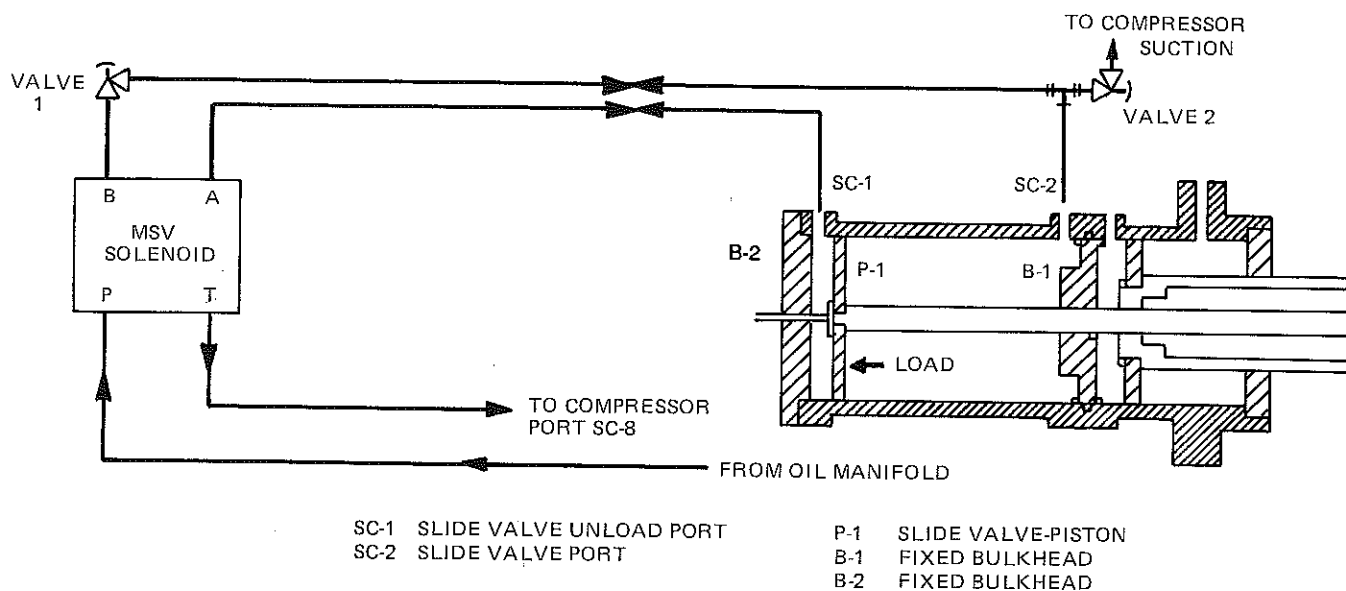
DOUBLE PURPOSE HYDRAULIC CYLINDER
